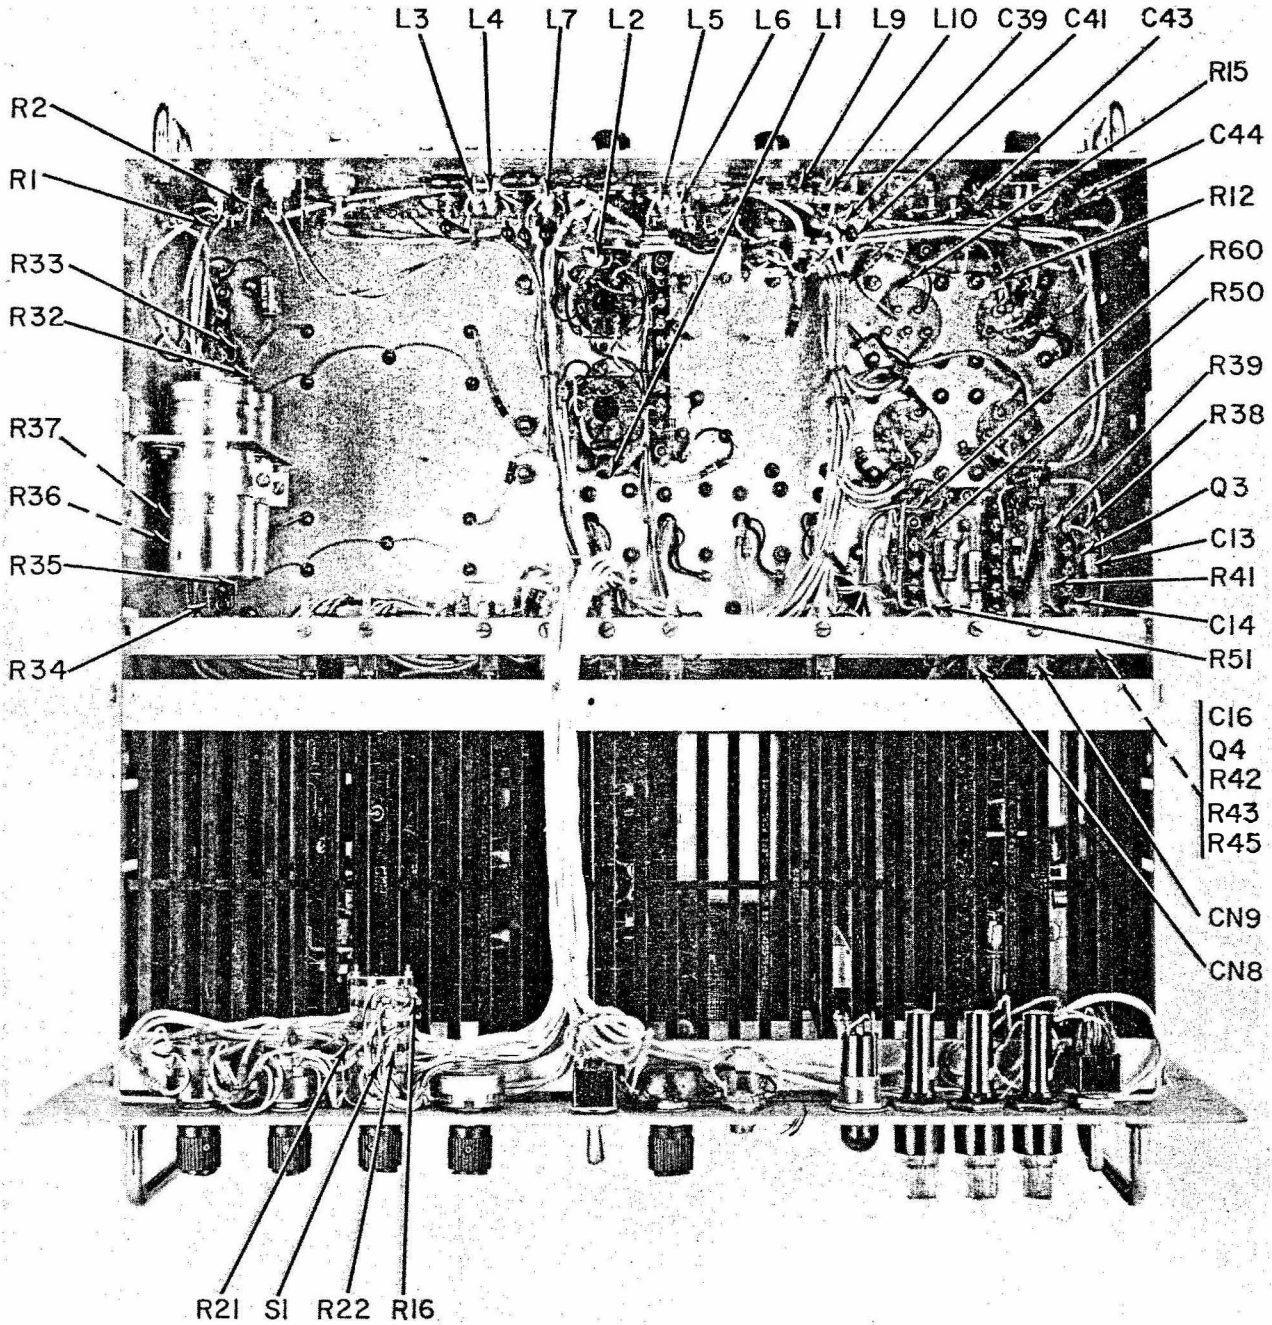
Chassis Mounted Component Location (Sheet 5 of 5)
